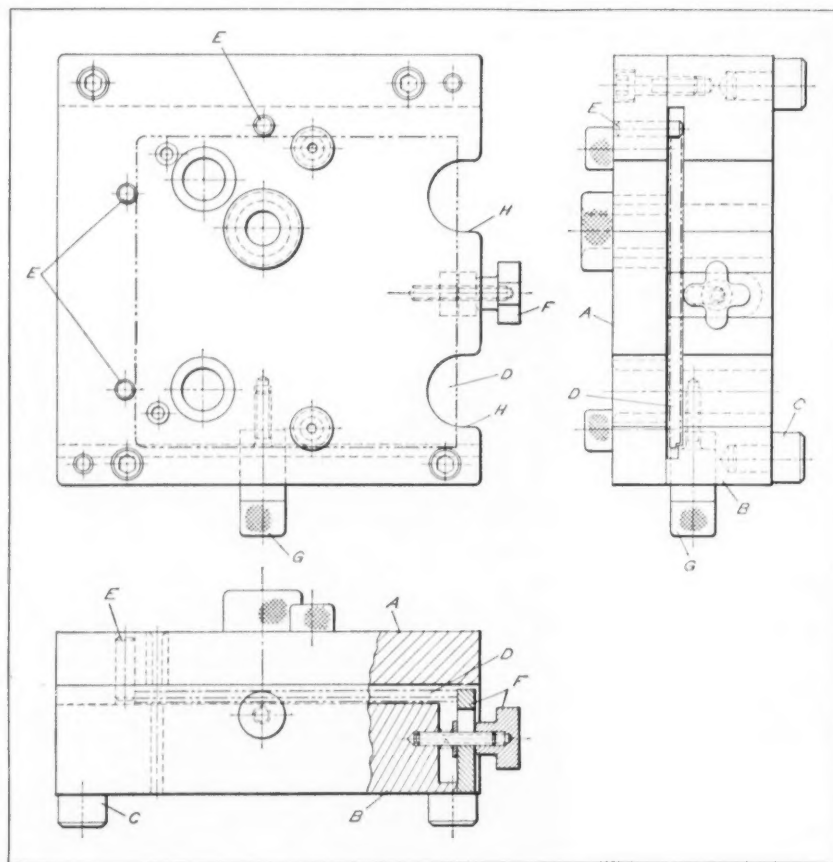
(Left) Simplified nutcracker jig showing the tongue-and-groove type of construction designed to eliminate side play when the tool is closed. This jig is especially suited for drilling holes that are located from the centers of other holes.
